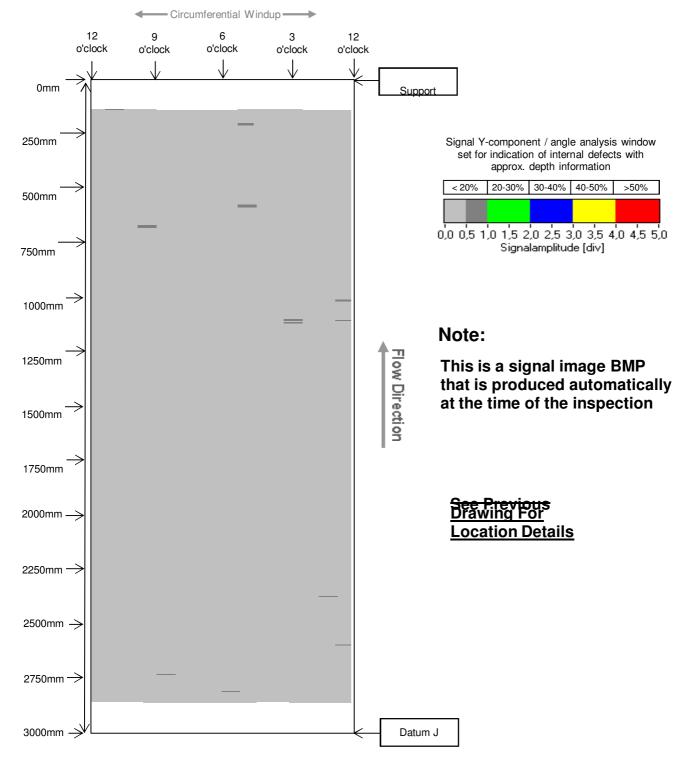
Drawing0Area5HSectionSection 41 (2.00 Metre)Date26 April 2016K-No.00-16	Area Section Date	Section 41 (2.00 Metre) 26 April 2016
